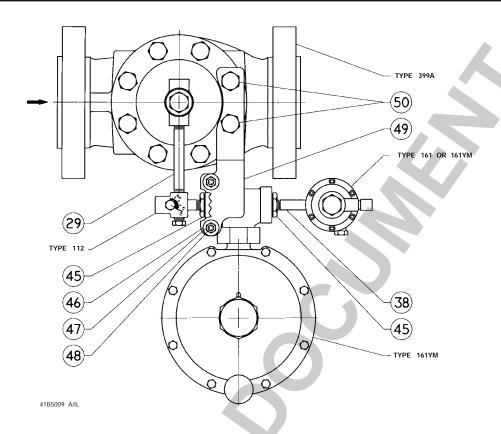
Pounds to Inches Working Monitor Mounting Parts
